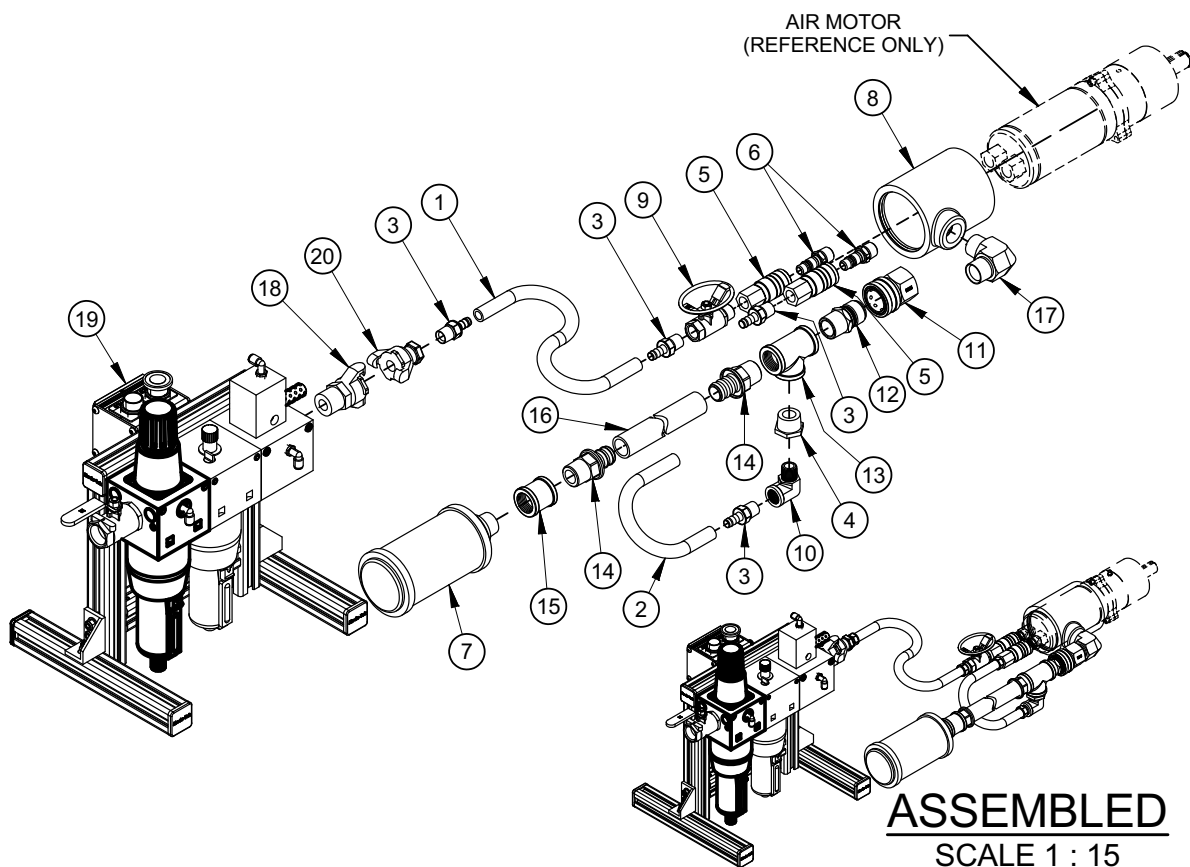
AIR MOTOR CE ASSEMBLY (P/N 28697)
